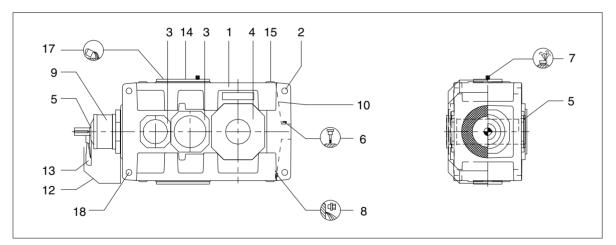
Gear-unit features on gear units type $B..M \ge 13$
